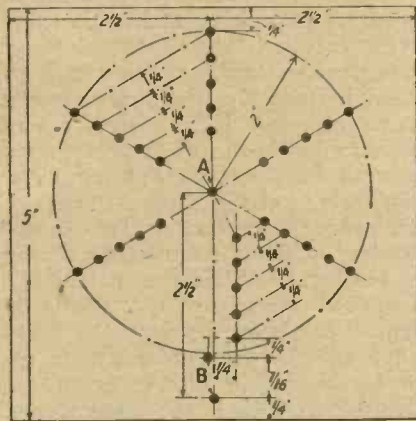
The dimensions for laying out the winding former may be obtained from this diagram.
